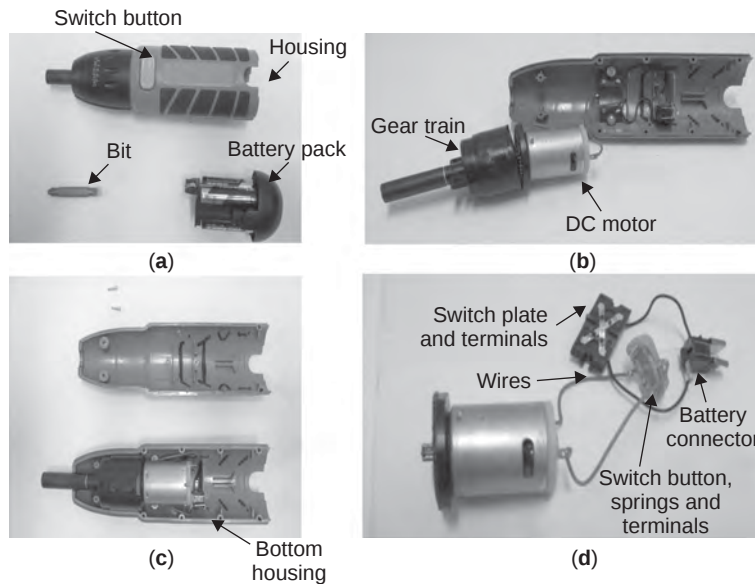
Industrial cordless screwdriver product, illustrating different stages of disassembly.
